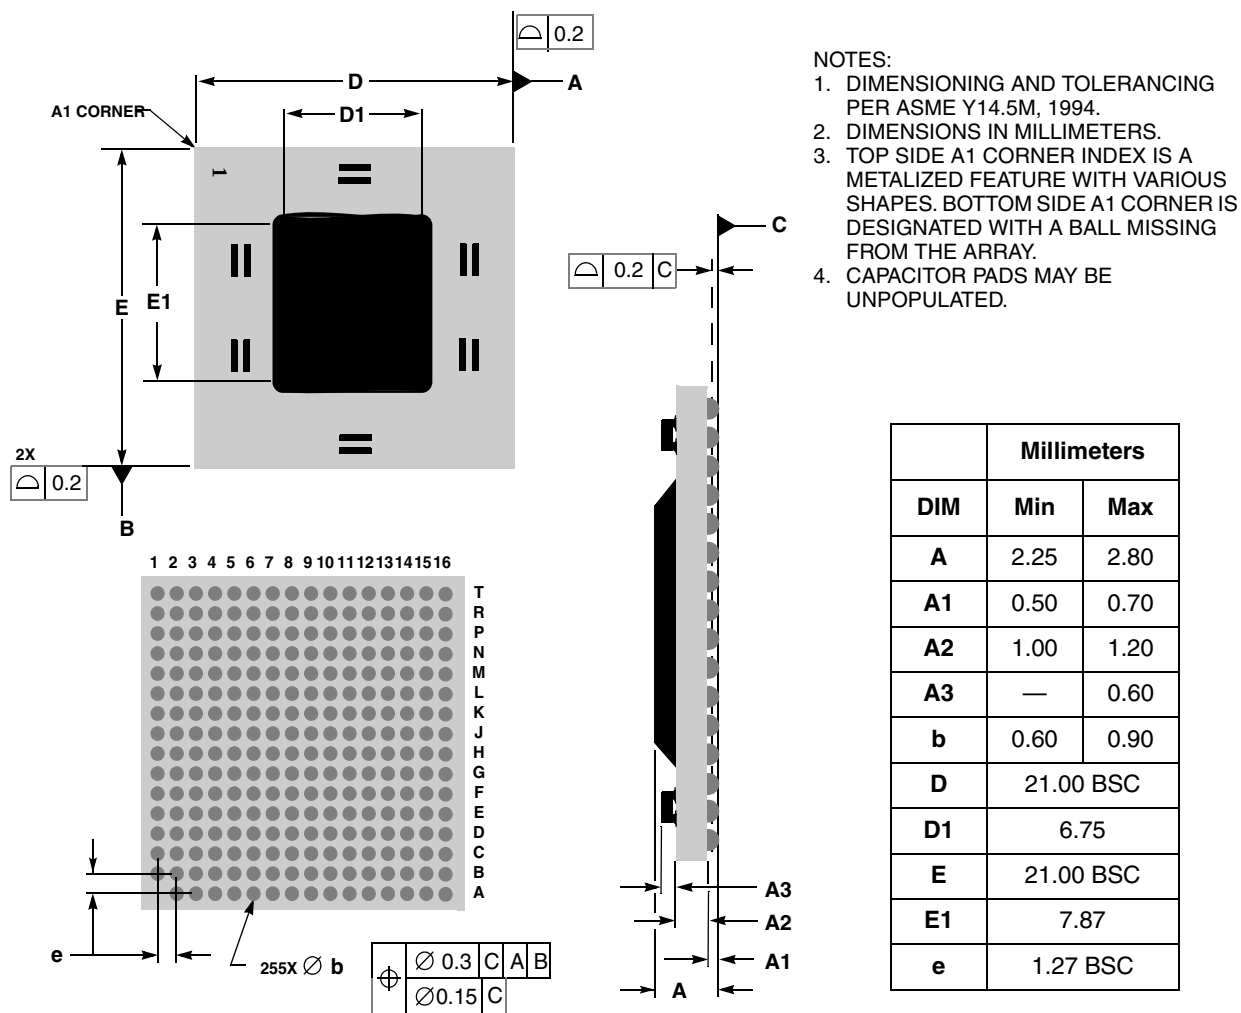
Mechanical Dimensions and Bottom Surface Nomenclature for the MPC745, 255 PBGA Package
